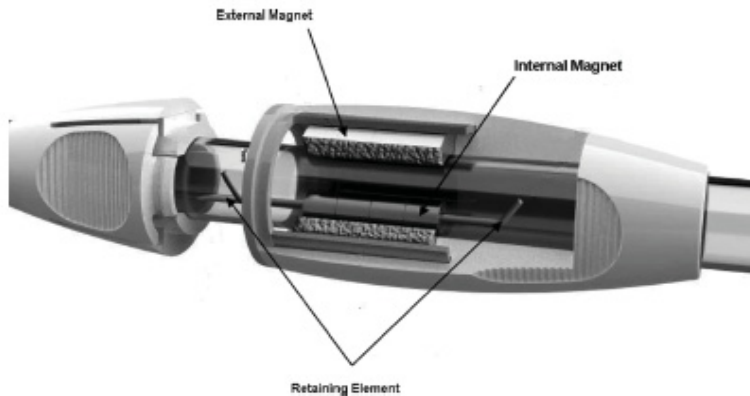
Tube clearance mechanism of active tube clearance system, descriptive illustration.
